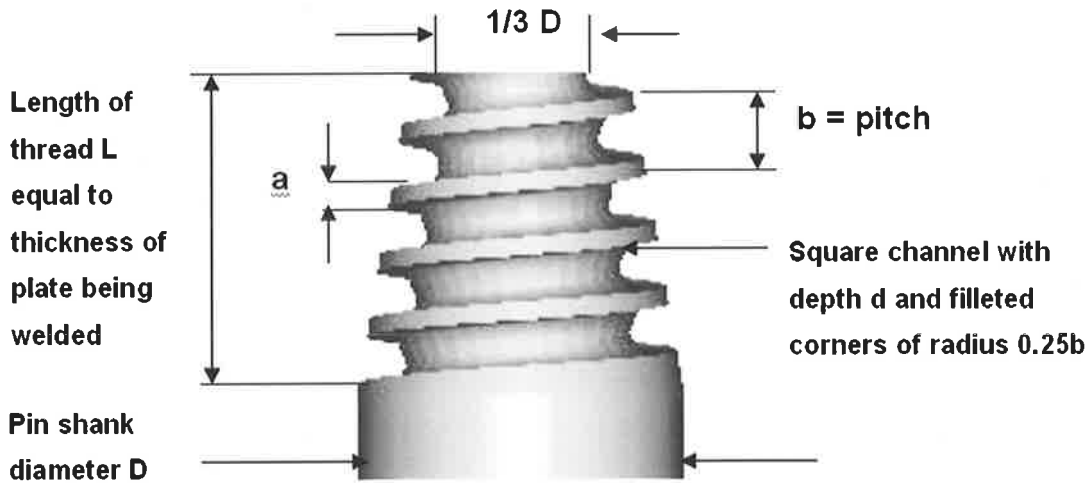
Generic thread profile CT1 trialed throughout experimental investigation. Note a and b were held constant over length L
